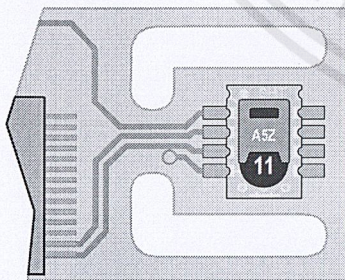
Top view of example of mounted SHT1x with slits milled into PCB to minimize heat transfer.
